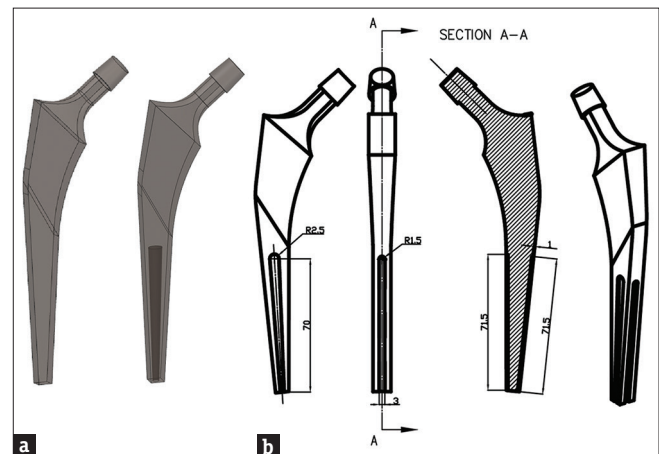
Hollow cone and cross groove design of the distal femoral prosthesis (a) Design drawing of distal taper hole; (b) Design drawing of distal cross groove
